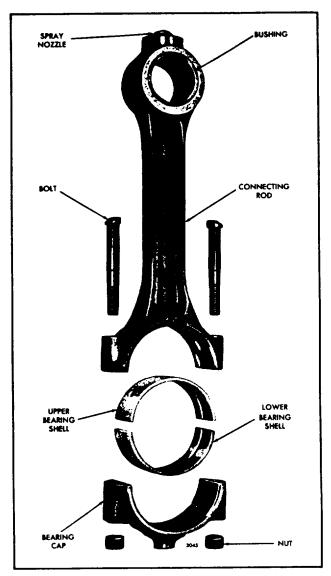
Typical Connecting Rod Details and Relative Location of Parts
